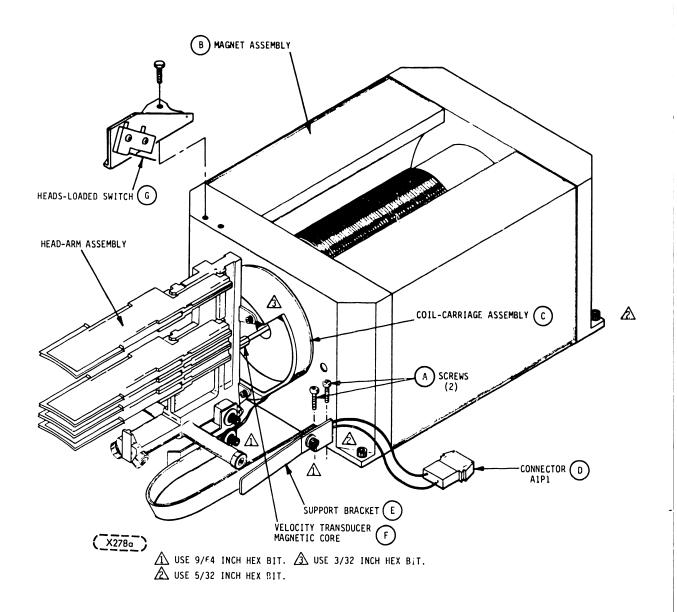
ACTUATOR ELEMENTS (POWER AMPLIFIER REMOVED)
